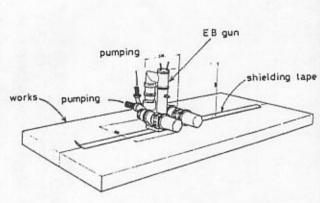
Mechanism of the local vacuum EB welding
